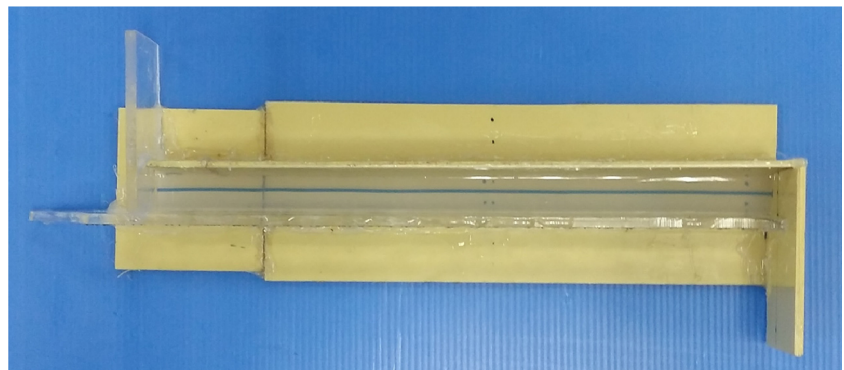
Wax filament fabricated by the developed silicone rubber mold
